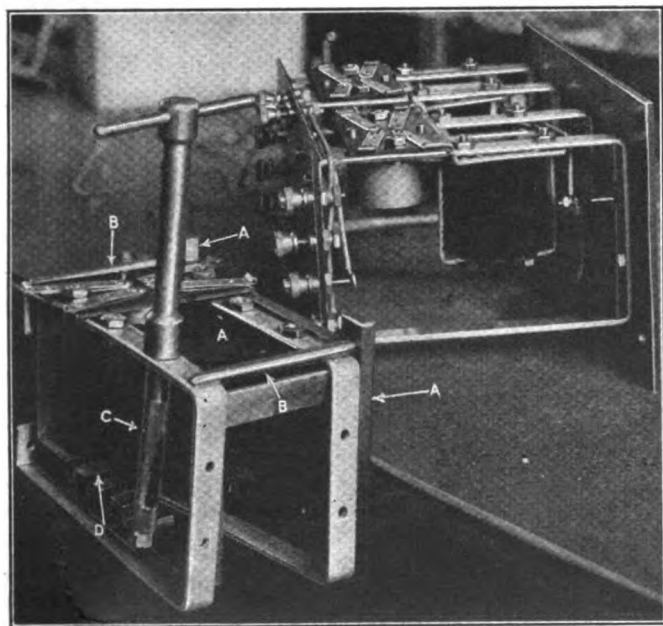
AN ASSEMBLING FIXTURE FOR UNIT FRAMES
